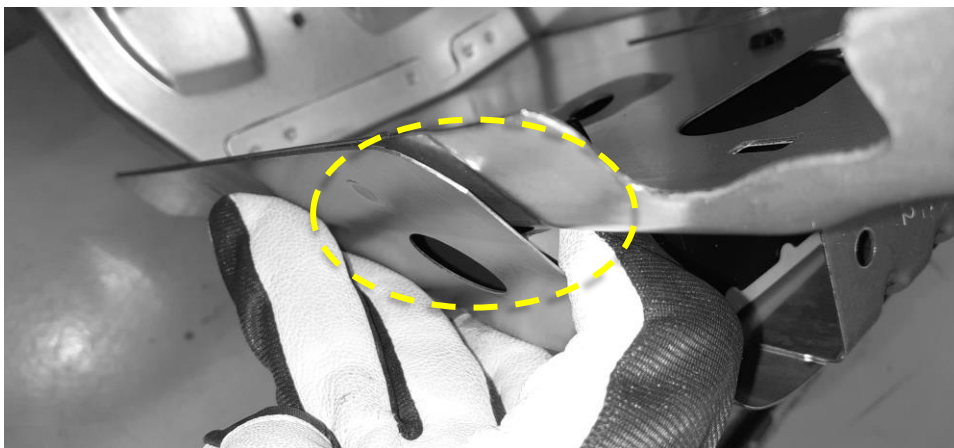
Spot welds not added at current step in manufacturing line.
